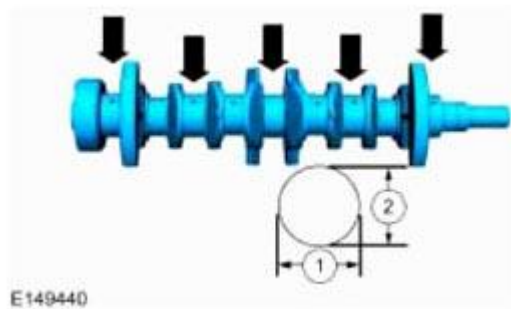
Identifying Crankshaft Main Bearing Journal Diameters Measuring Directions
